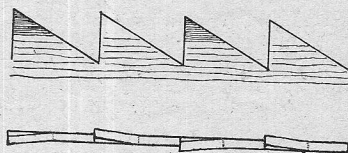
Plan and elevation of teeth of rip-saw, showing setting and sharpening
